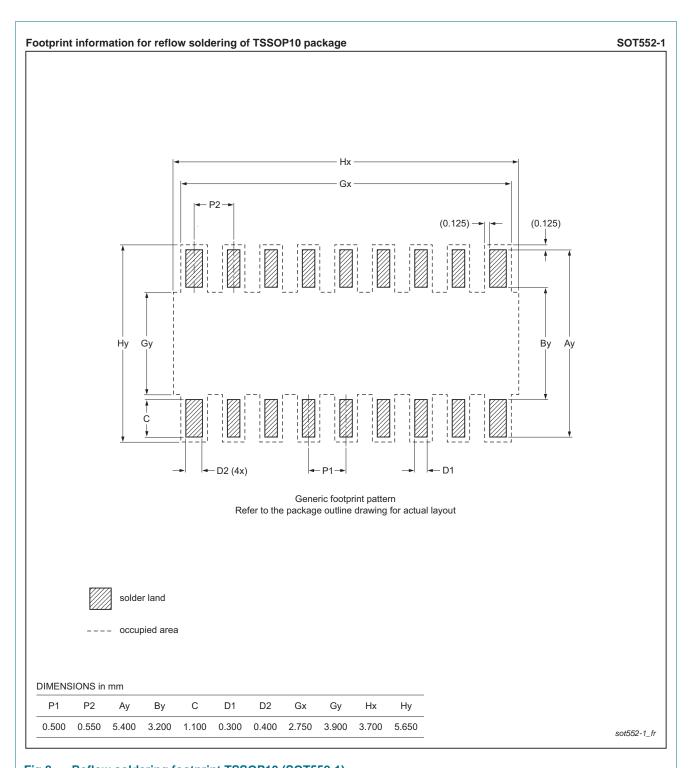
Reflow soldering footprint TSSOP10 (SOT552-1)
